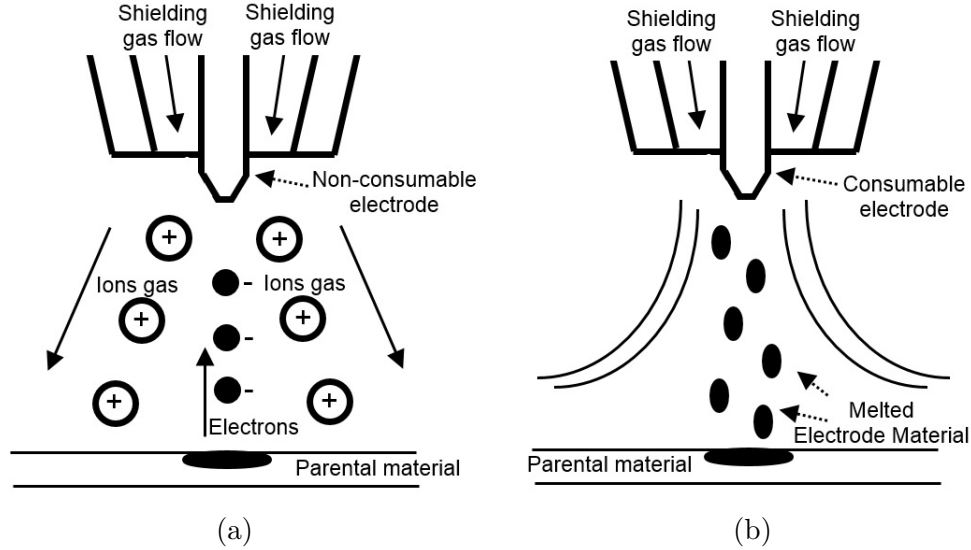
Illustration of the weld manufacturing: (a) Tungsten inert gas (TIG); (b) Metal inert gas (MIG).
